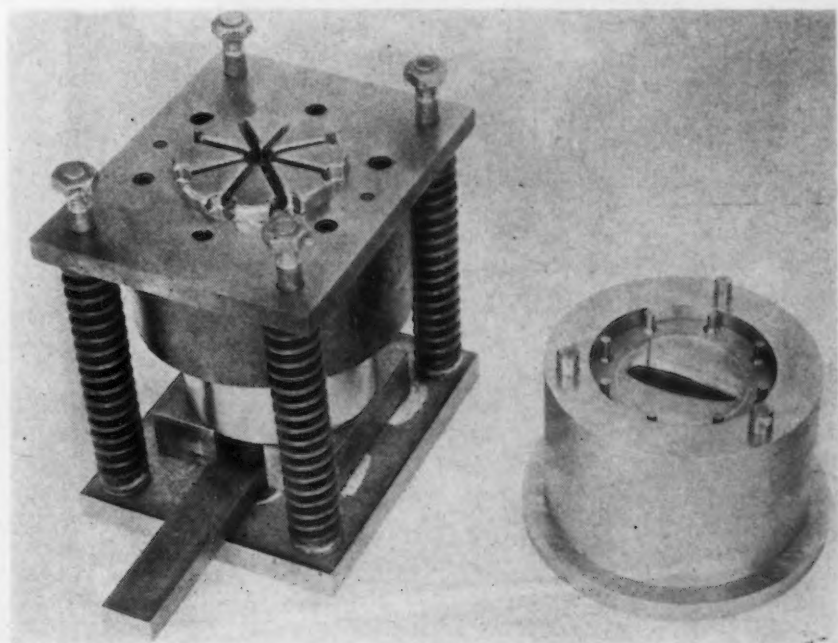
Transfer mold for stub antenna mast showing pot and cover plate assembly removed from hobbled Kirksite cavity block and chase.
